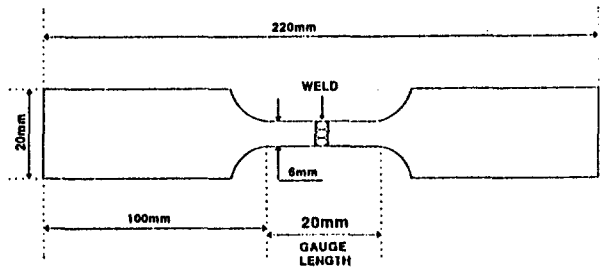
(a) Transverse tensile test configuration for welded joints
